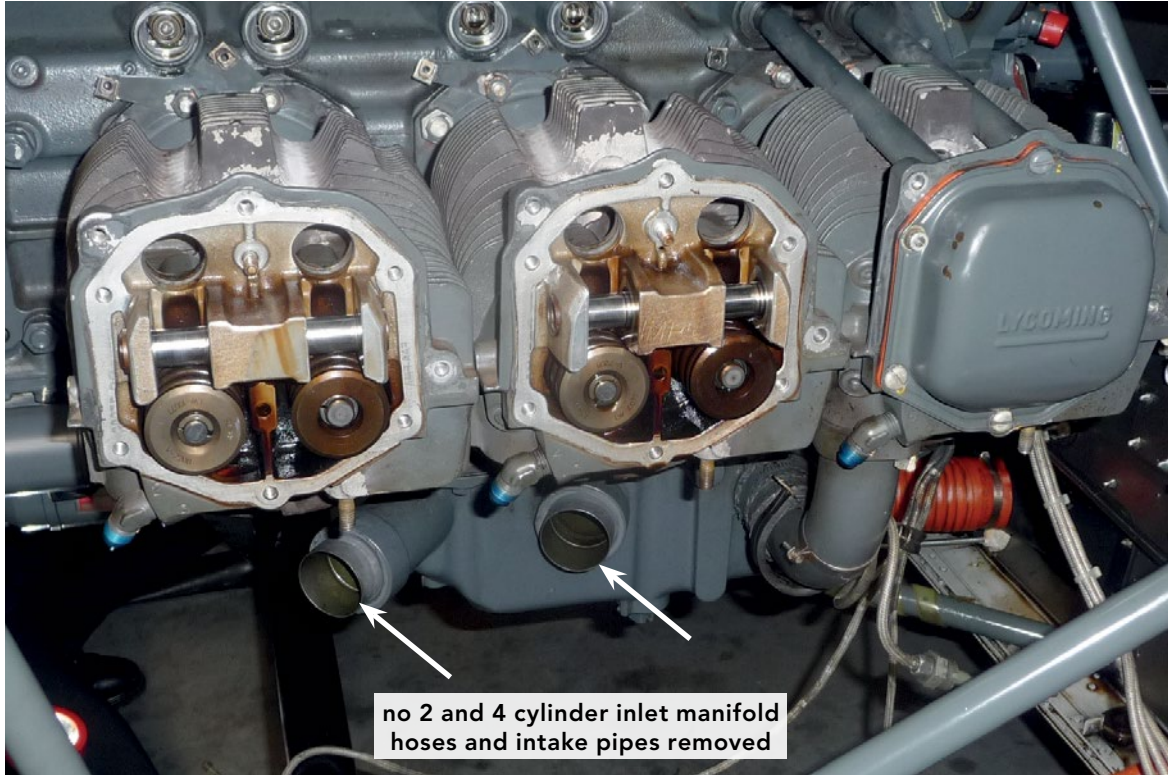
PH-WMW engine. Hoses and intake pipes of cylinder 2 and 4 removed. (Source: Dutch Safety Board)
